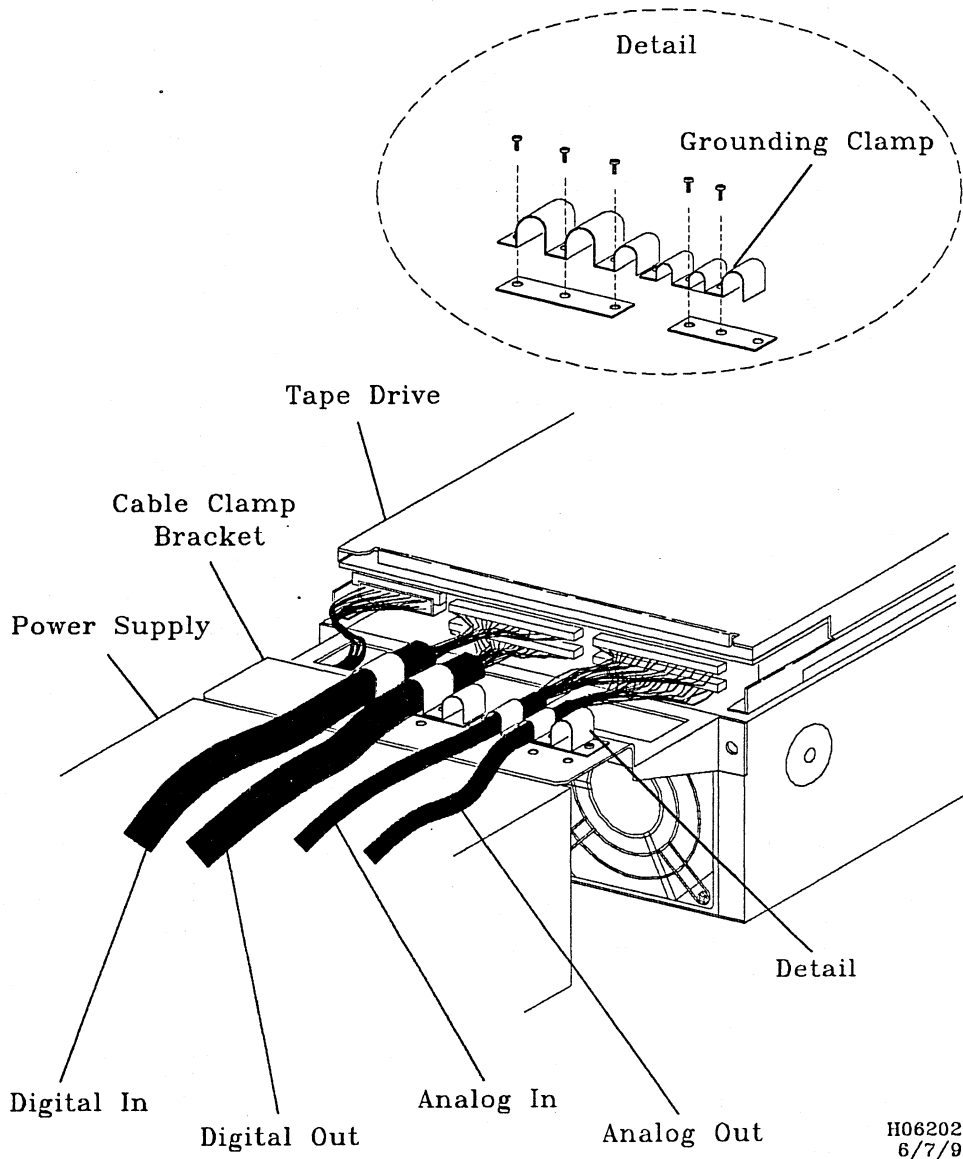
, Cable Shielding Clamp for First Tape Drive
